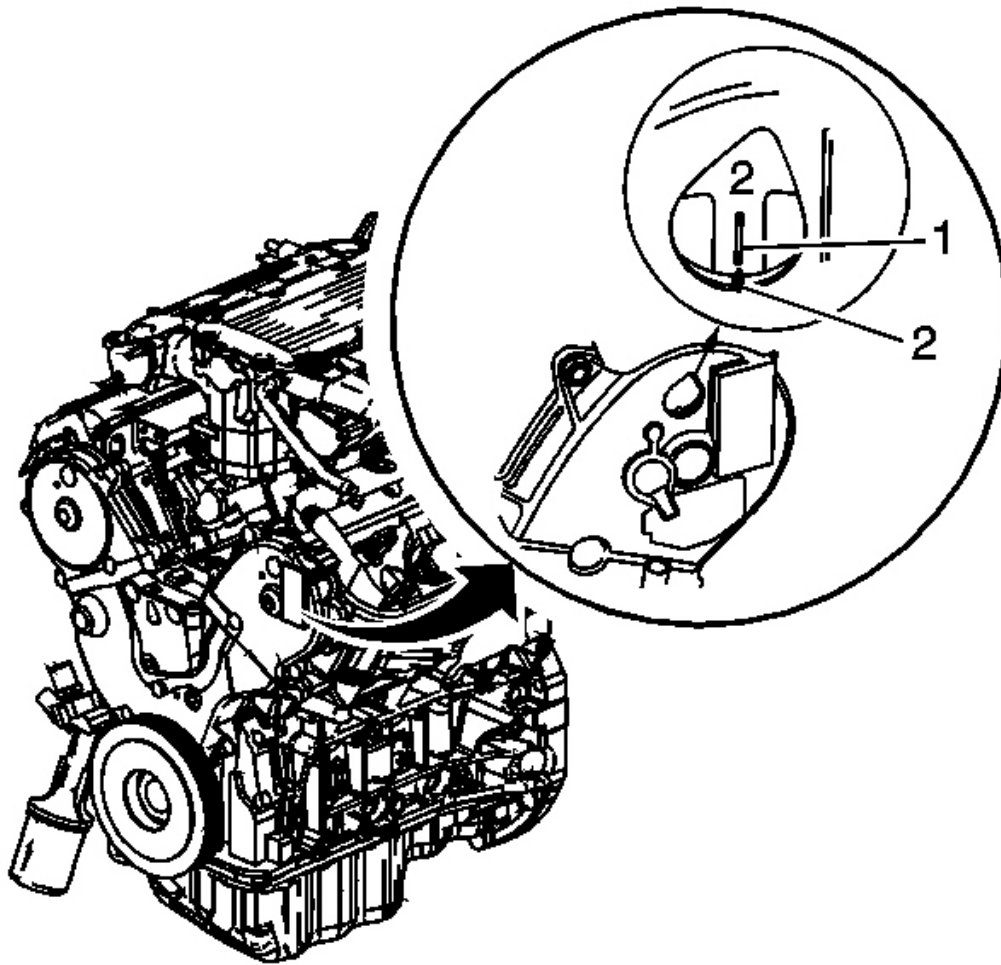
View Of The Adjusting Cylinder Number 2 Valve Clearance
